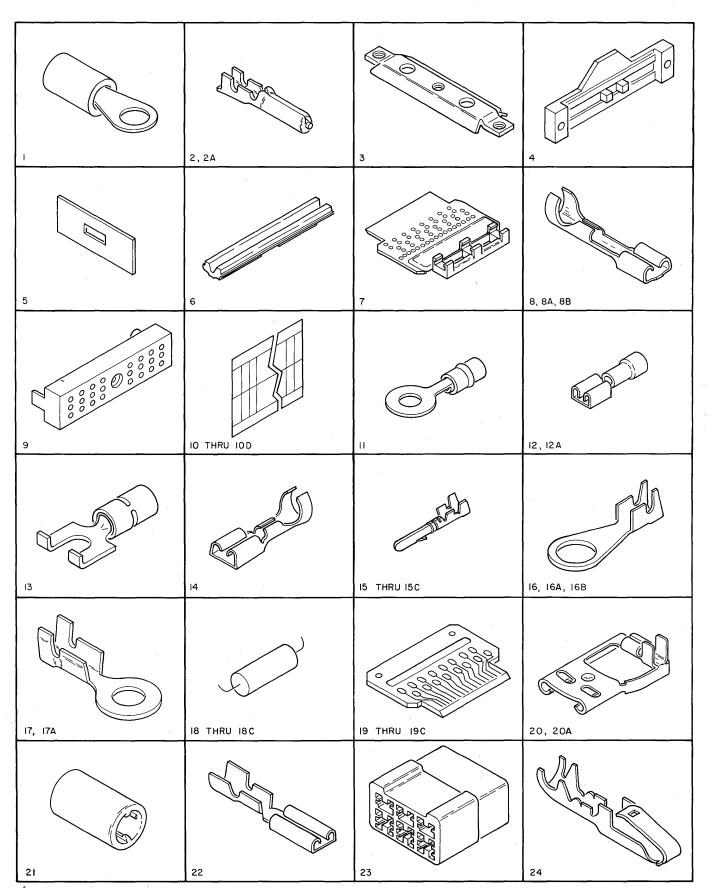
CABLE COMPONENT PARTS. SHEET 1 OF 4. INDEX NOS. 1-24.
